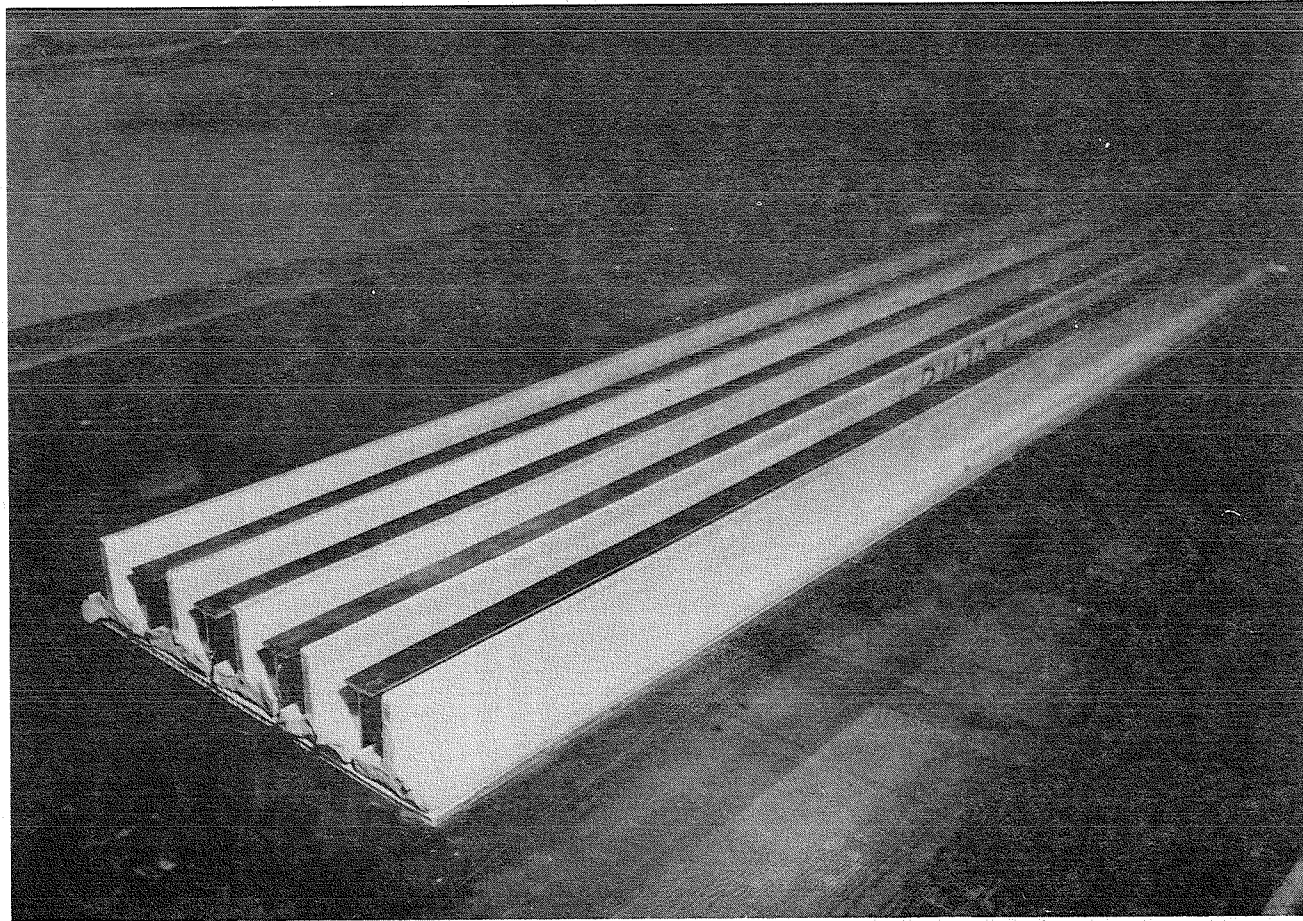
"I" Stringer in Bonding Position With "1" Pressure Cauls Installed
